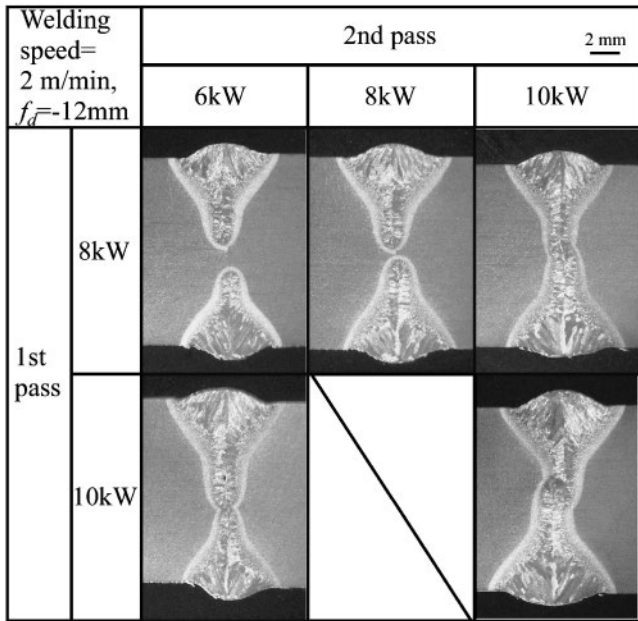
Cross sections of square-groove butt welded joints of 12 mm thick Ti-6Al-4V titanium alloy by single-pass hybrid welding from both sides with different laser powers.
